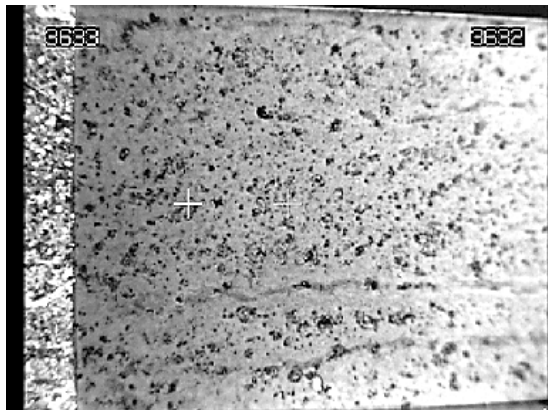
3 mil coating on corroded aluminum. The narrow strip on the left is unpainted
